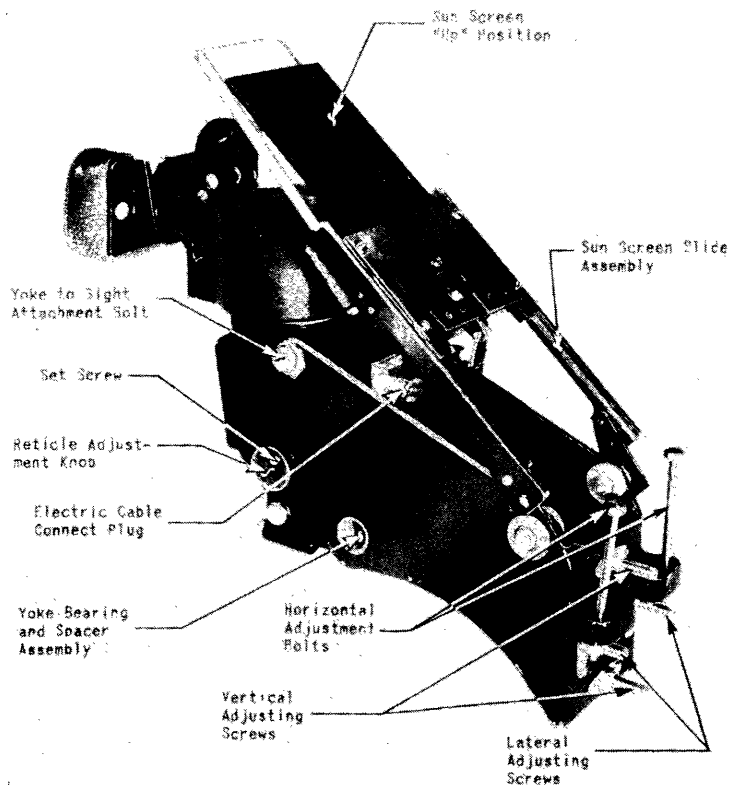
Bore-Sighting Guns - Target Method (Sheet 4 of 8 Sheets)
